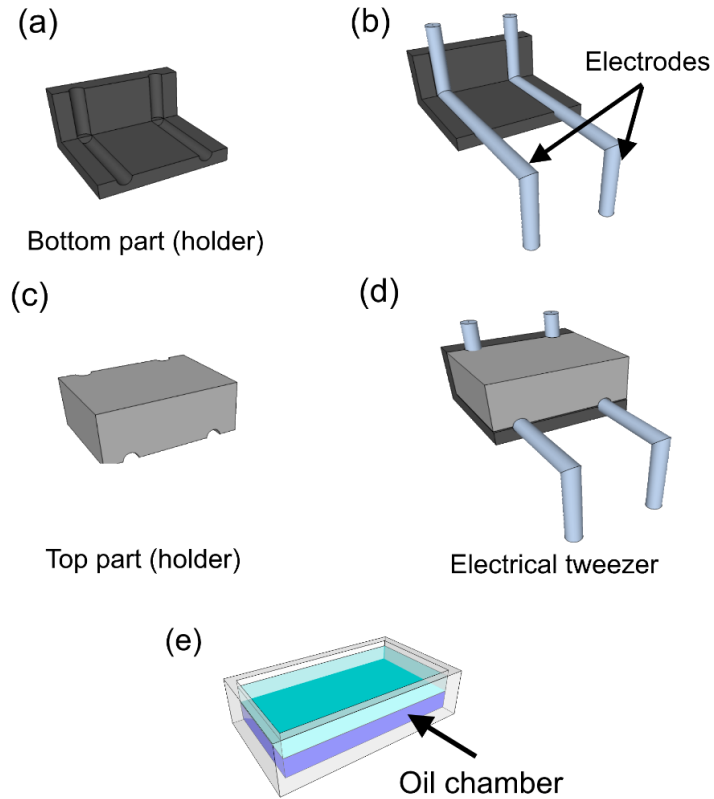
Assembly of electrical tweezers. (a) Bottom component of the electrical tweezer holder. (b) Placement of electrodes on the bottom component of the holder. (c) Top component of the electrical tweezer holder. (d) Placement of the top component and anchoring with the bottom component of a holder to complete the assembly. (e) The acrylic chamber filled with a bi-layer of oil (Paraffin and Fluorinert oil).
